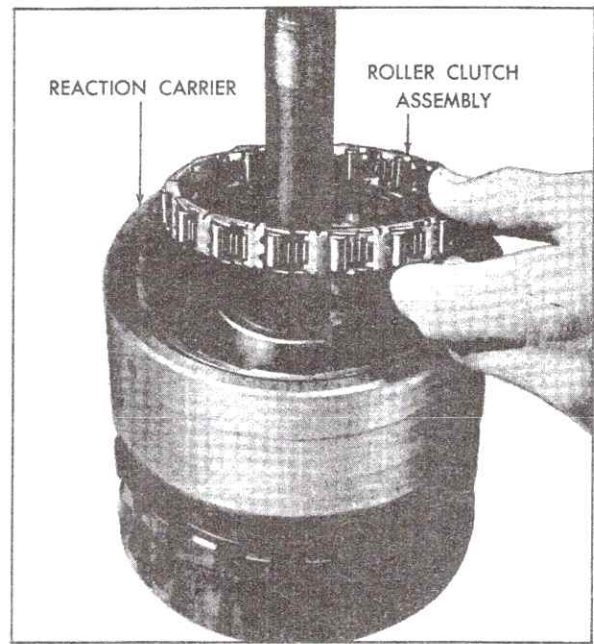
Installing Roller Clutch Assembly in Reaction Carrier
